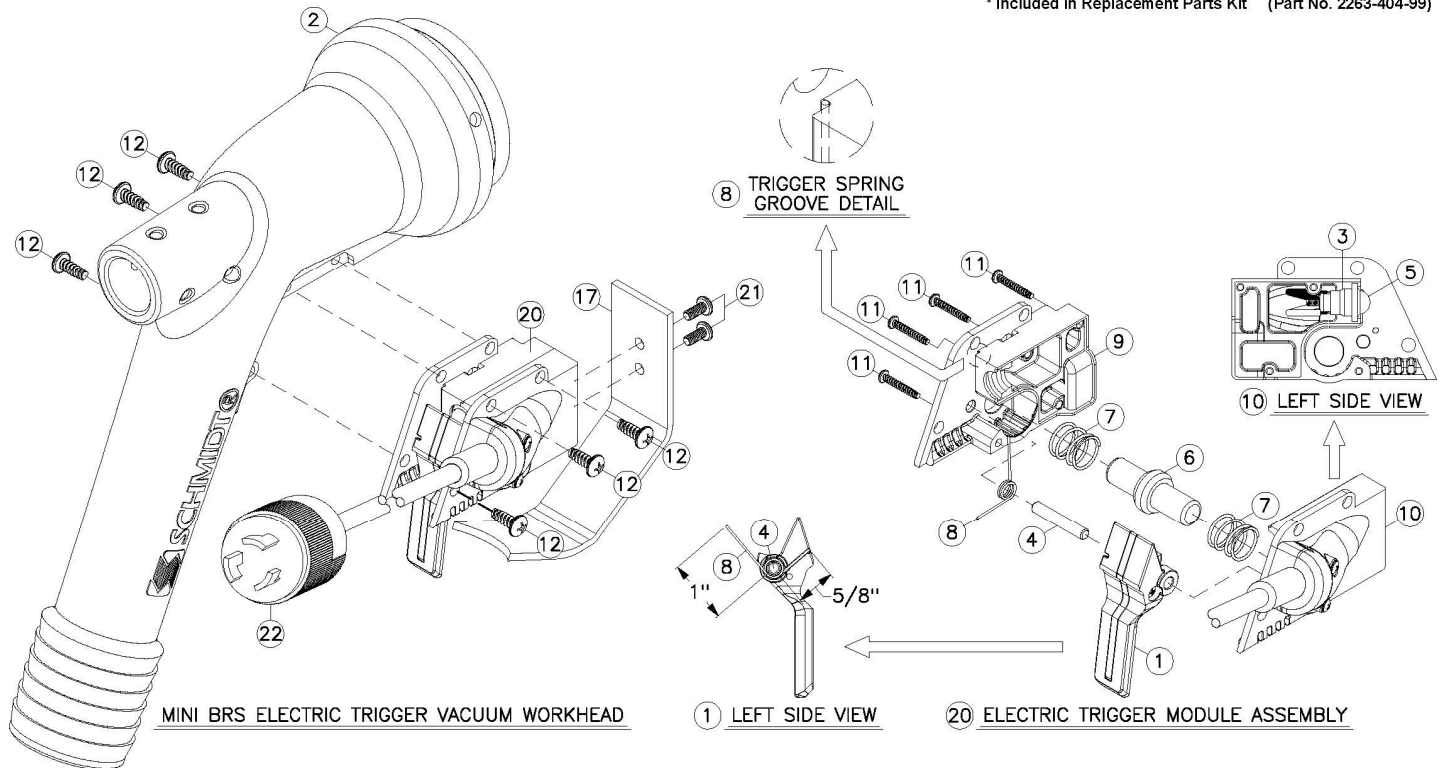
G2 Electric Trigger Vacuum Workhead Assembly
